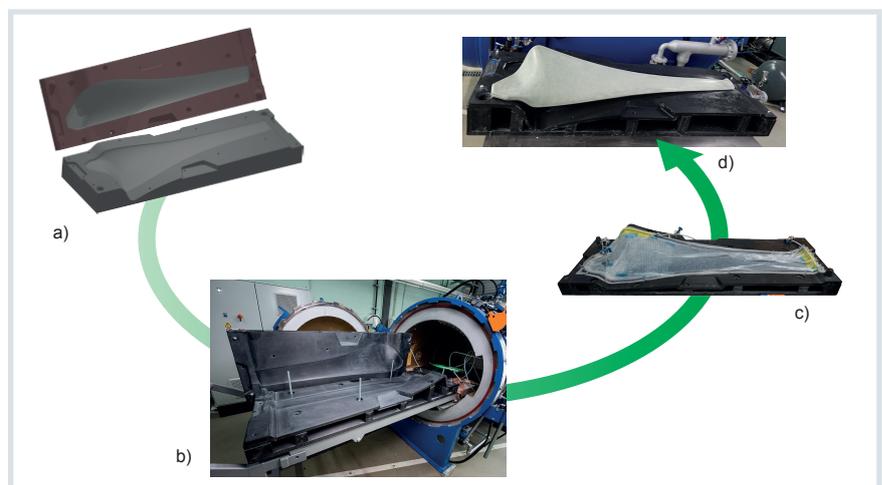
Development of the mold for manufacturing rotor blades. a) CAD model of the mold; b) printed mold; c) infusion of a rotor blade half; d) rotor blade following gluing of both shell halves Source: BTU; graphic: © Hanser
